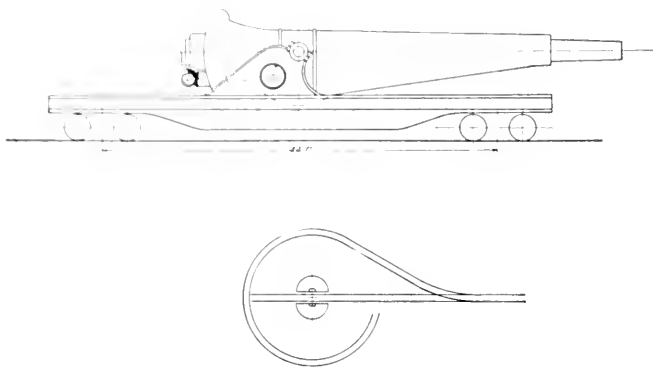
GUN WITH SPECIAL RECOIL DEVICE MOUNTED ON RAILROAD CAR, AND CIRCULAR TRACK FOR TRAVERSING THE CAR
